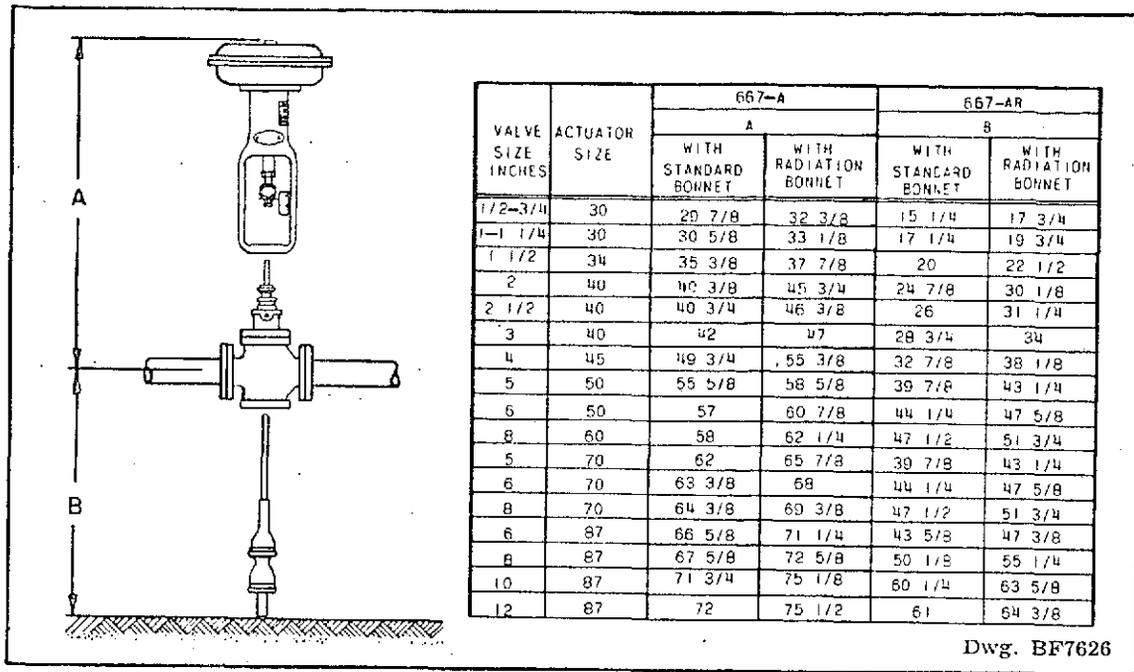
Removal clearance required for a Type 667-A or 667-AR control valve. Values are for top and bottom guided double port valve bodies. Therefore, clearances are ample for port guided valve plugs and all single port valves.
